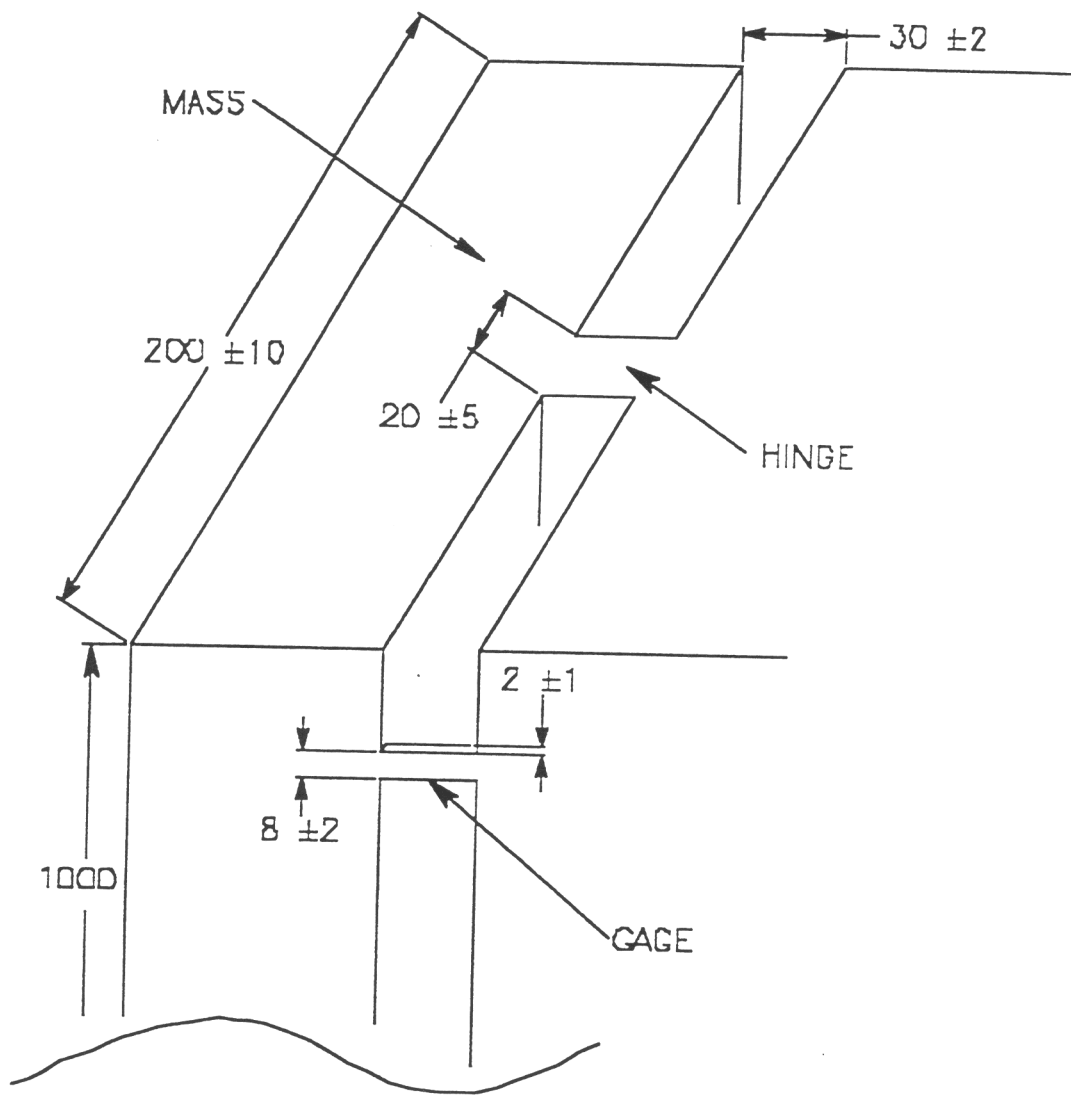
Drawing of 7270A hinged proof mass and gage showing approximate dimensions for the  $\pm 200,000$  g device.
